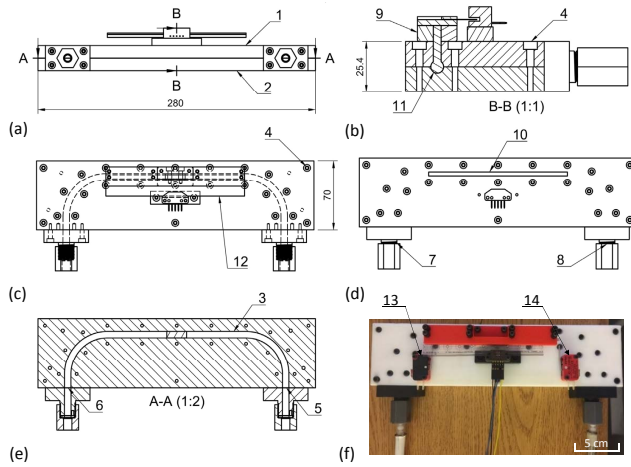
End loop actuator (Fusion360 perspective drawing): (1) Upper layer (2) Bottom layer (3) Inner channel (4) Screw hole (5, 6) Channel ends (7, 8) Tubing fitting and adapter (9) Carriage (10) Slot (11) Piston (12) Optical encoder strip (13, 14) Stop switch.
